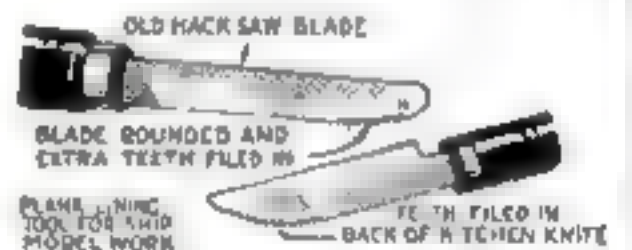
Either an old hack saw blade or a common paring knife can be used for the tool.
